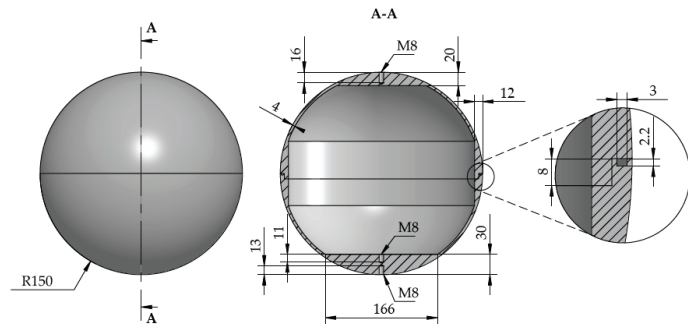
Technical drawing of the two hemisphere shells. Measurements are in mm.
